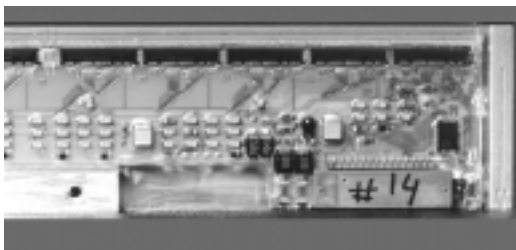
Photograph of one end of a completed prototype readout section, mounted on a prototype tray (aluminum closeout).
